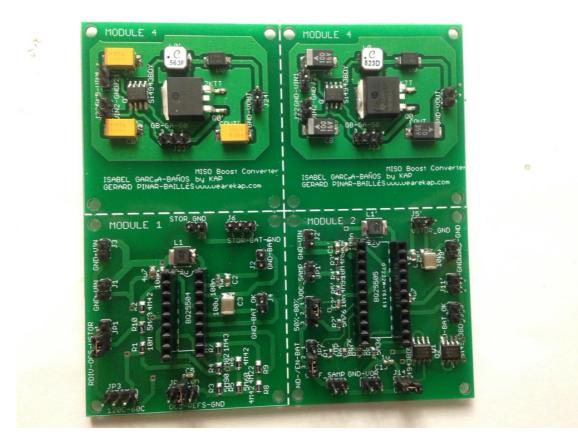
Complete 2nd order prototype welded [Self-made]
